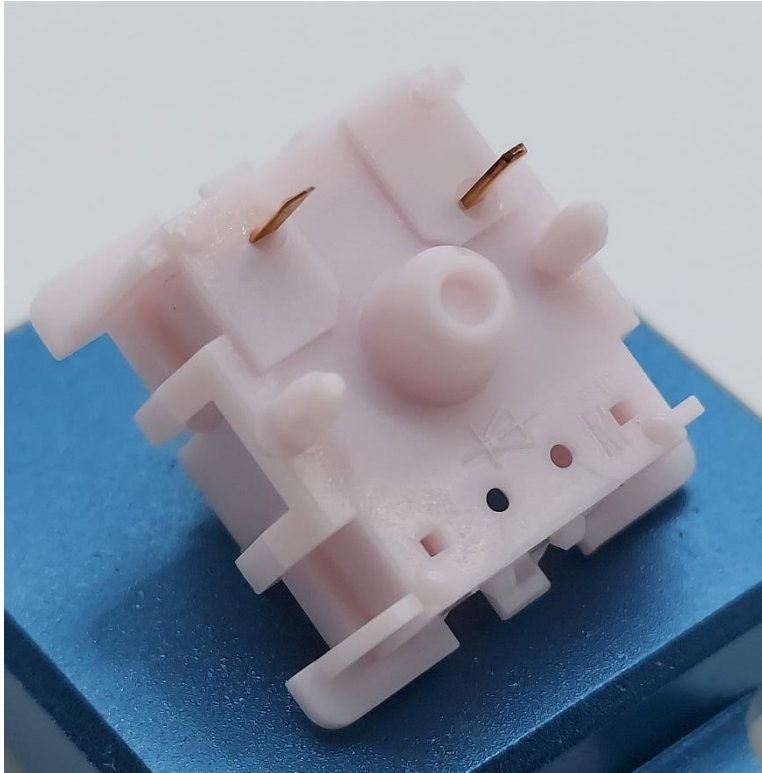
Single letter mold marking on the underside of Konpeitou bottom housings.
